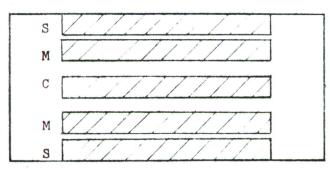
Locations of Fracture Toughness Specimens in 11/16x16-in. Extruded Integrally Stiffened Panels.
